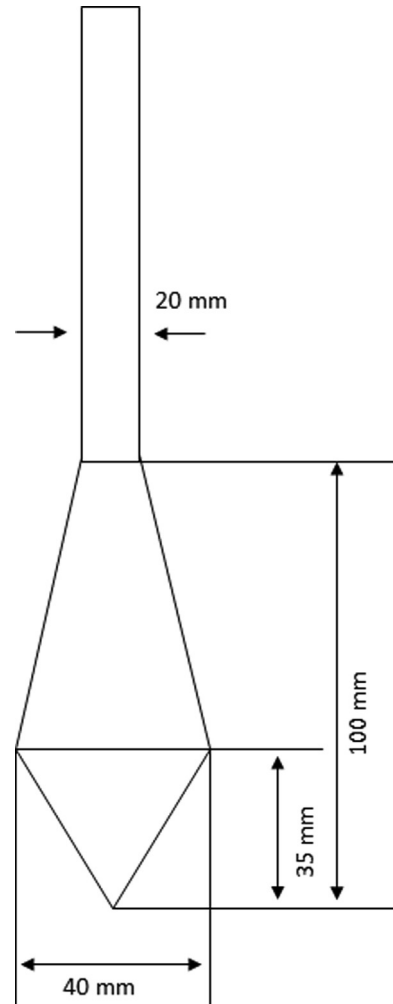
Construction of Rammsonde penetrometer. Redrawn in agreement to the schematic in (Abele, 1963).
